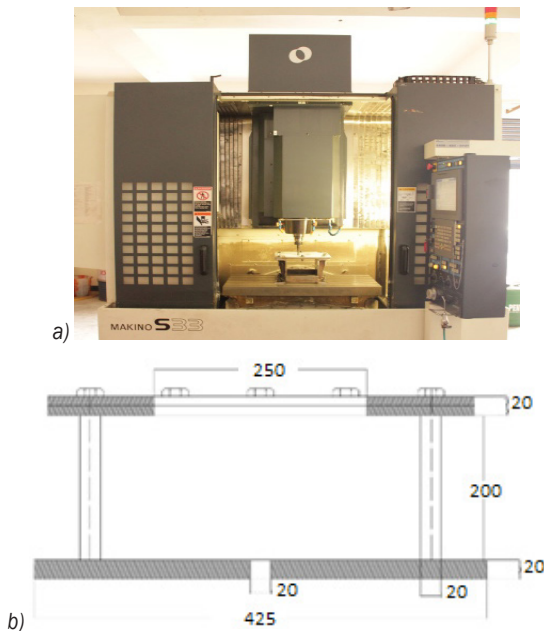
a) Three-axis CNC milling for incremental forming, and b) three dimensional fixture of SPIF process
